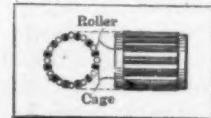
Showing a roller bearing with the rollers and cage indicated.
